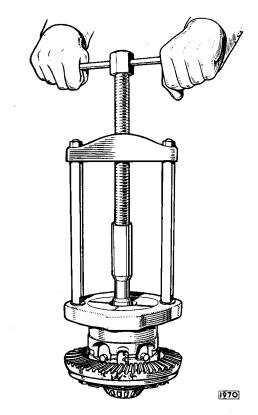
Withdrawing a differential bearing using Churchill Tool Part No. SL.14 with adaptor No. SL.14—3.
